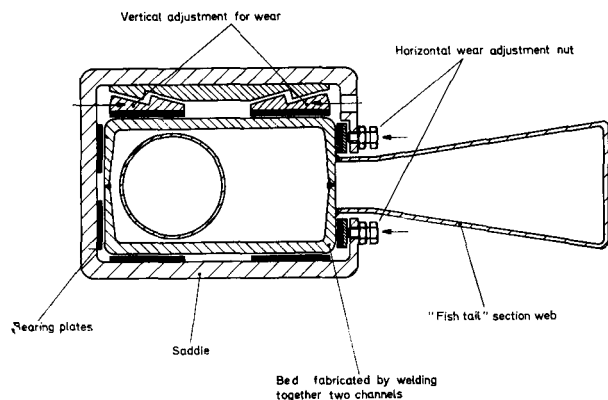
(c) Later version of (b) with adjustable bearing clearance.
